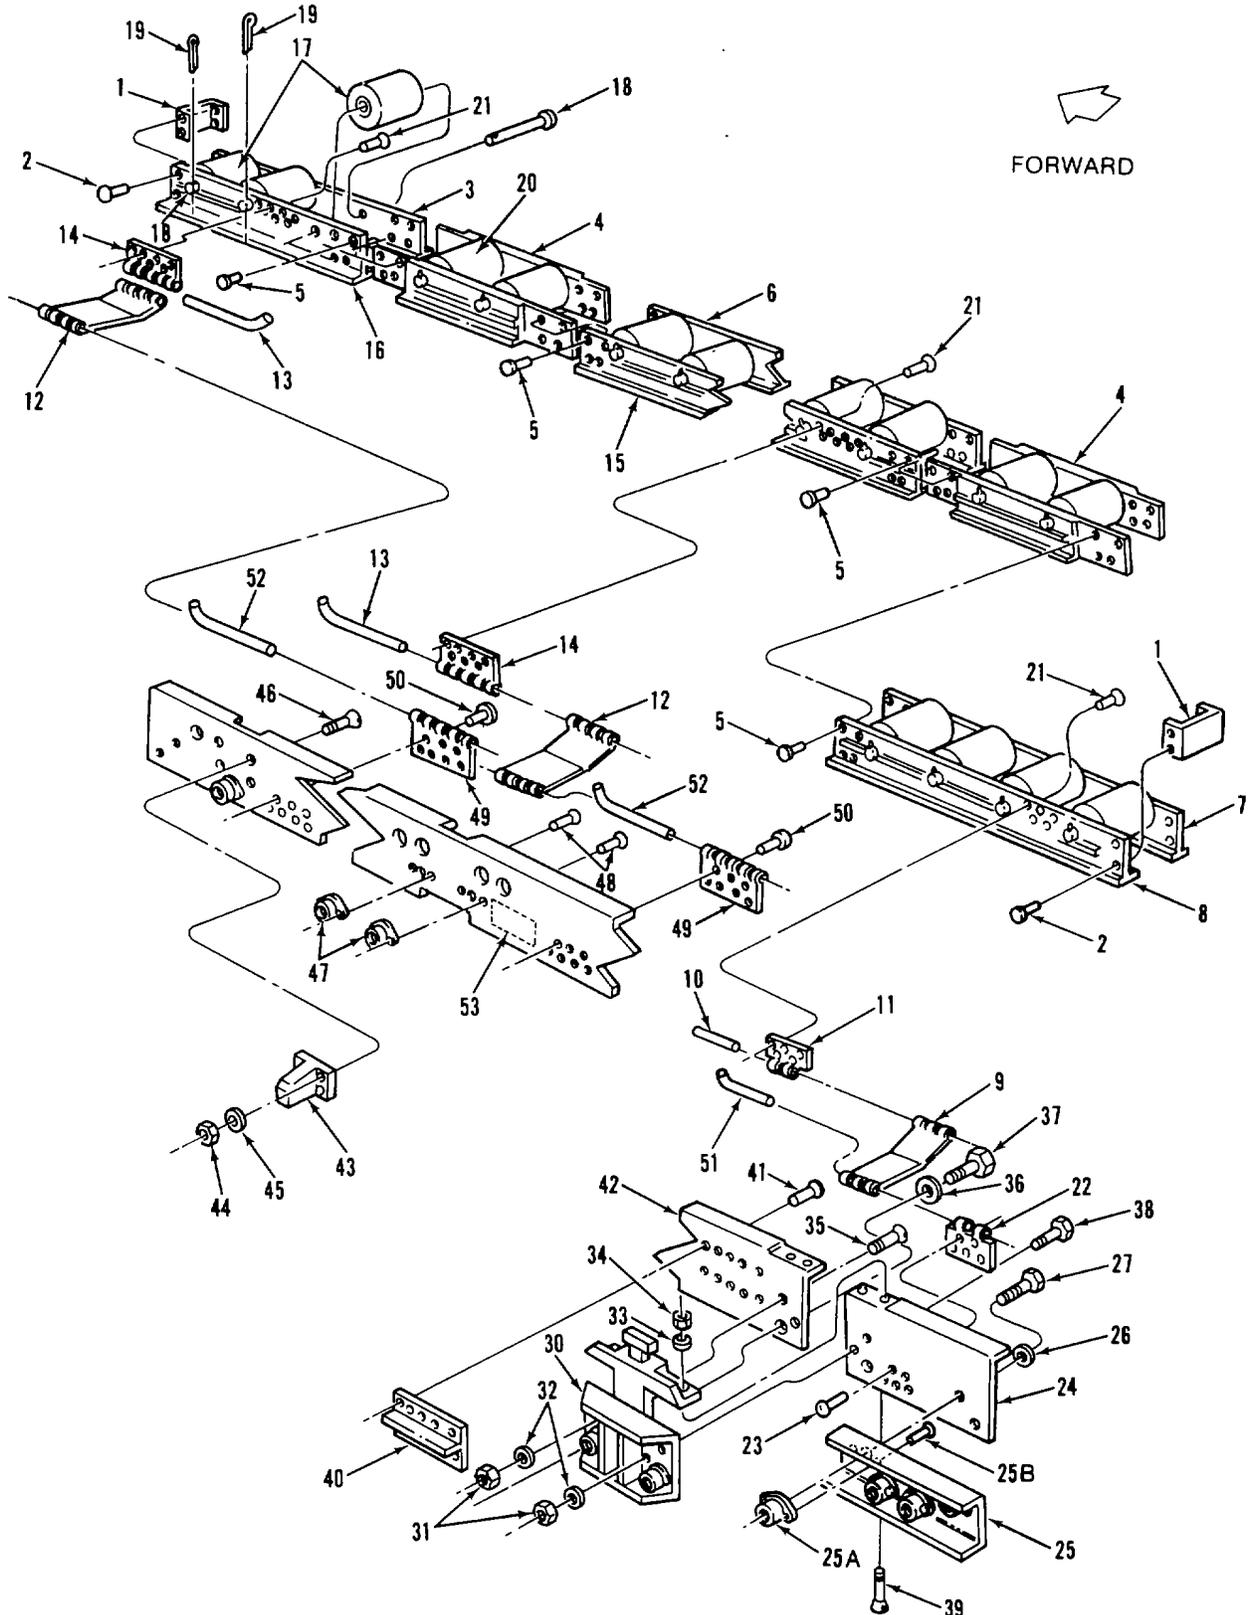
Outboard Rail/Roller Assembly, Stations 272.531 to 374.000
